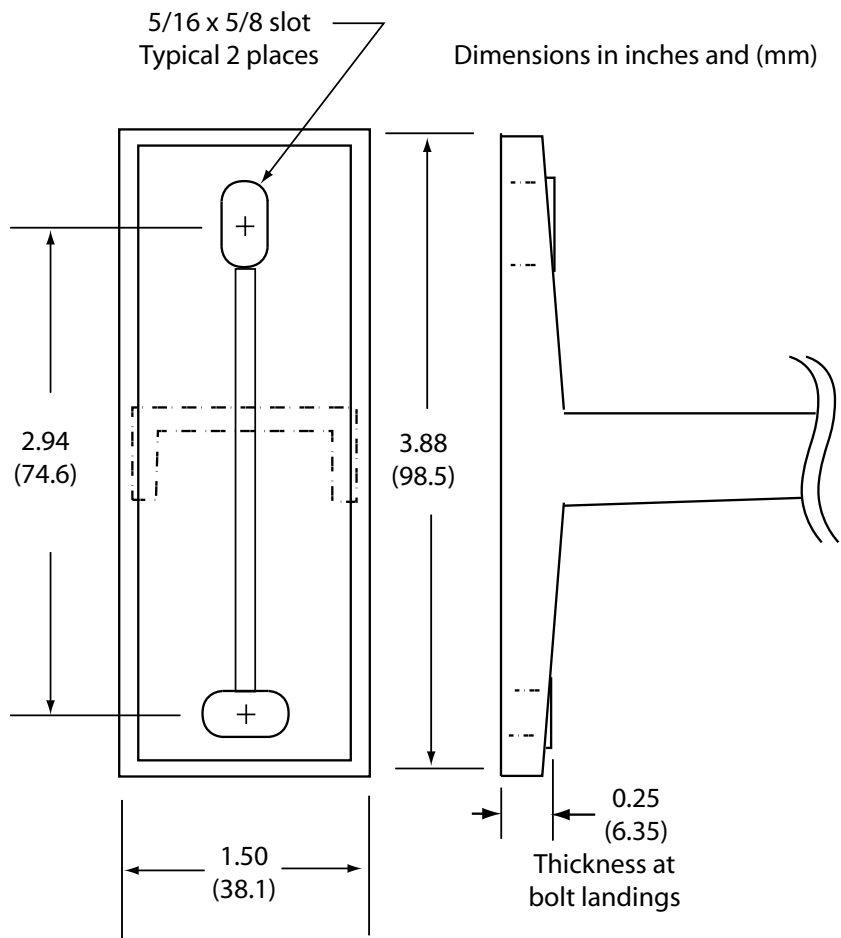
Mounting Dimensions, Standard Wall (WALL) Mount
